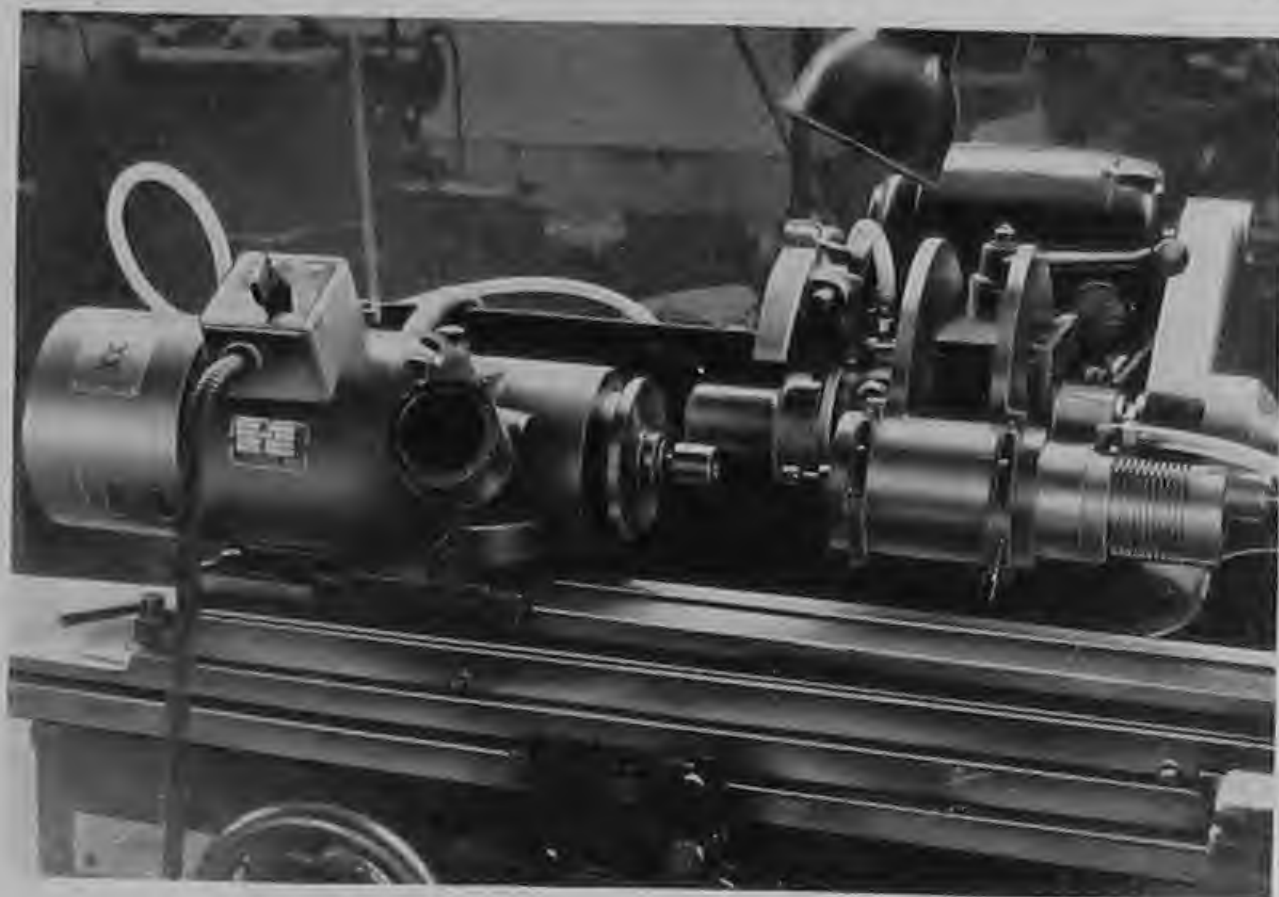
Studer RHU 450 grinding machine with aerostatic bearings in the workhead, wheelhead and high frequency motor driven internal grinding spindle. The machine is shown set up for bore grinding a test piece. This machine was converted by Westwind Turbines Ltd. for S. Smith & Sons Ltd. who use it to produce aerodynamic gas bearing components for gyroscopic instruments
